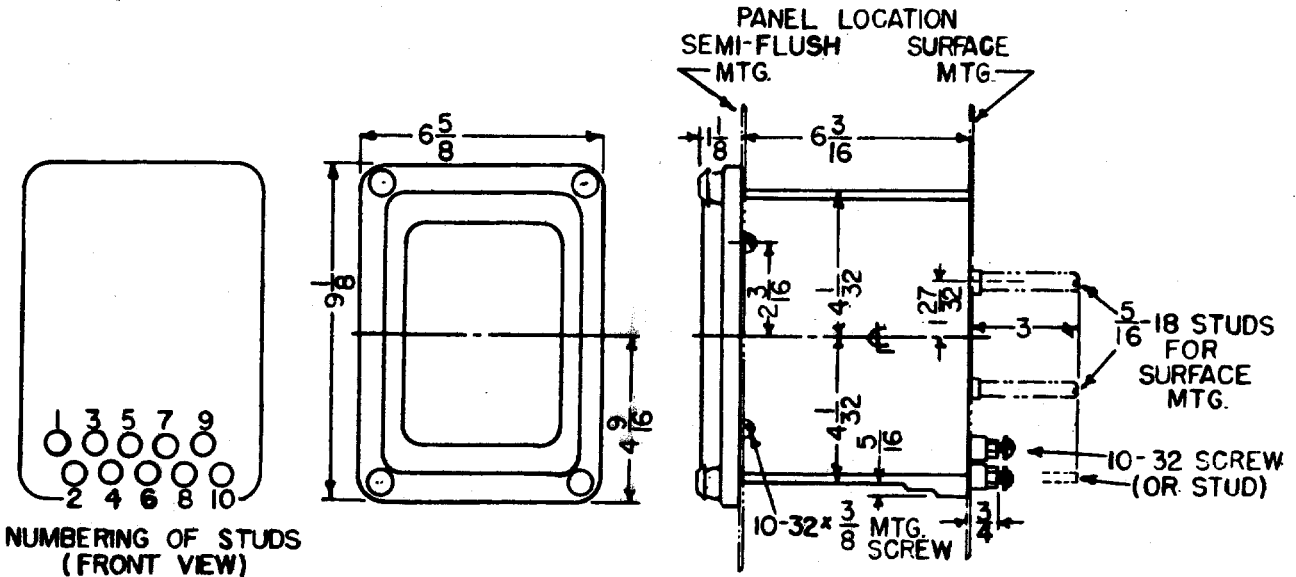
(K-6209271-3) Outline And Panel Drilling Dimensions For The S1 Case
